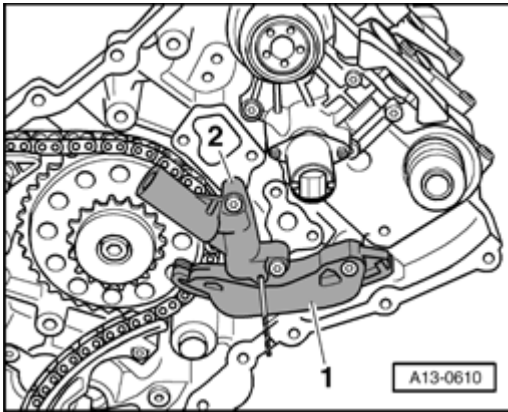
Removing Glide Track At Right Cylinder Head & Chain Tensioner
